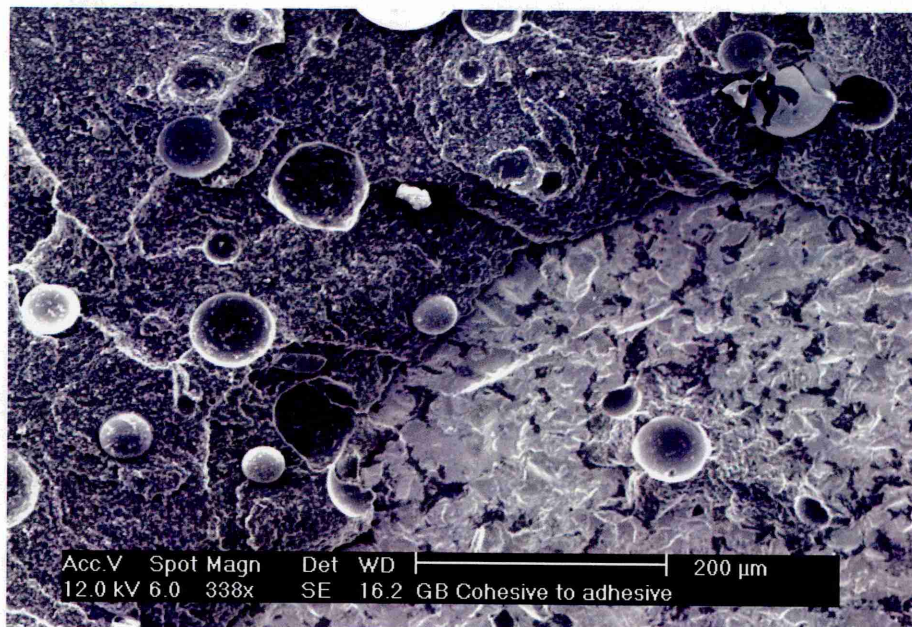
Metal side of the alumina grit blasted fracture specimen
